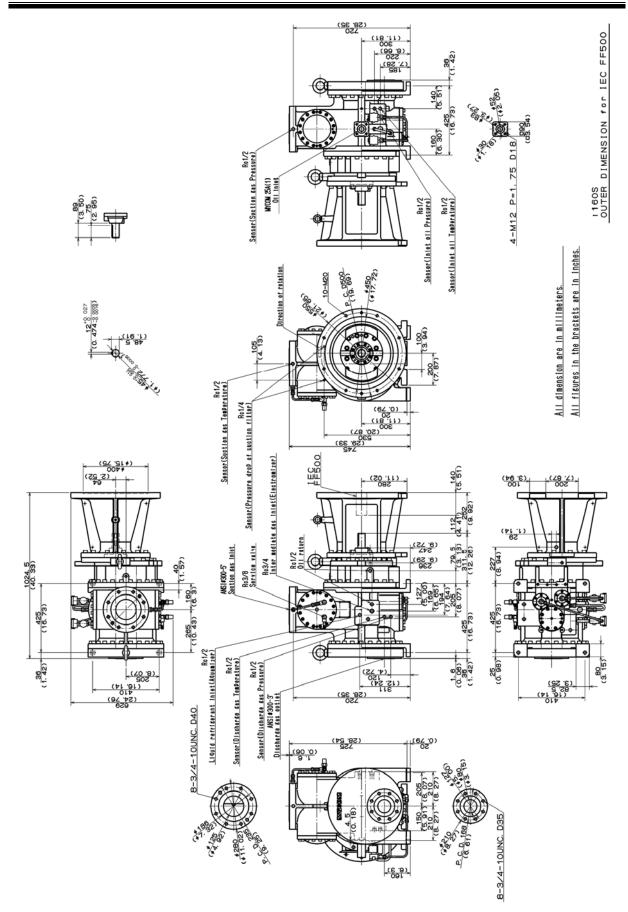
i160S Outer Dimensions with a Spacer for Motor Flange (IEC FF500)
